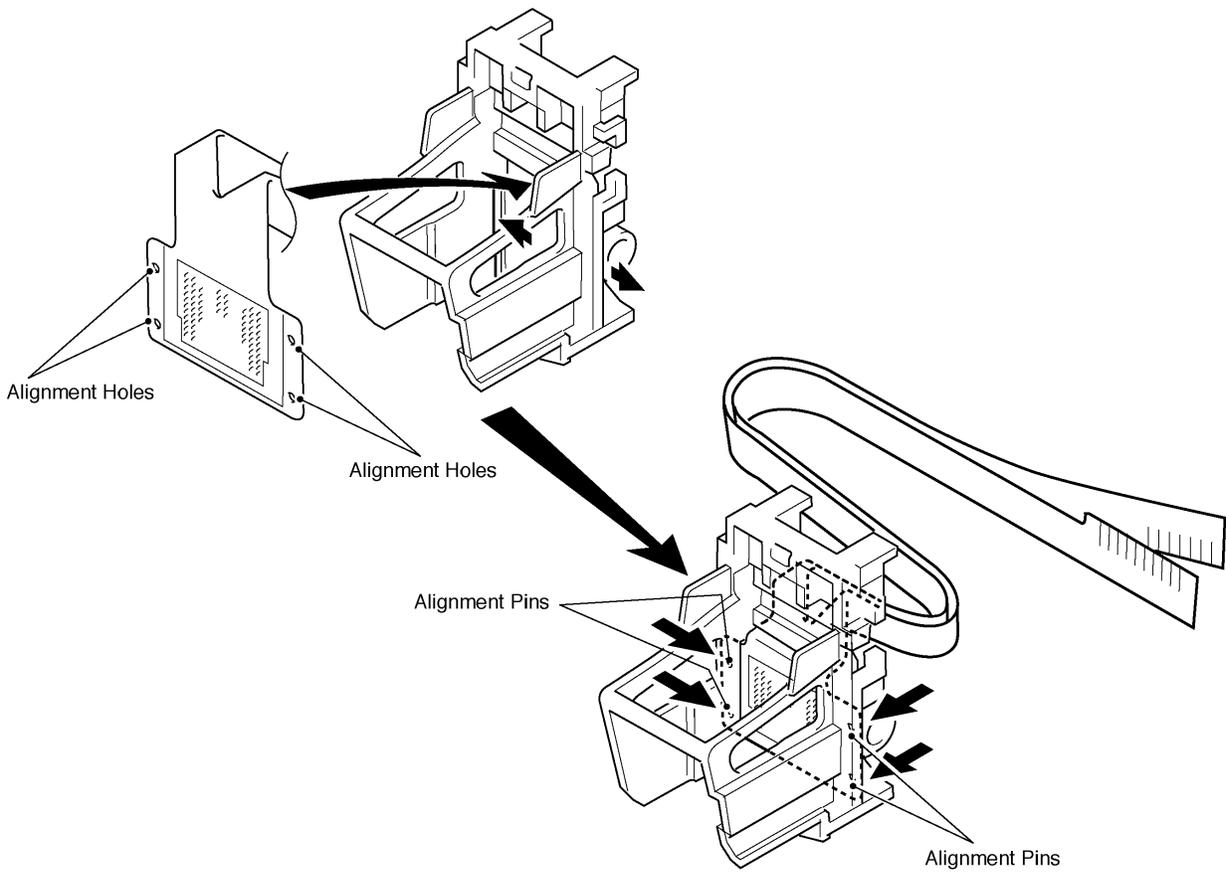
Printer Flat Cable to Cartridge Alignment
